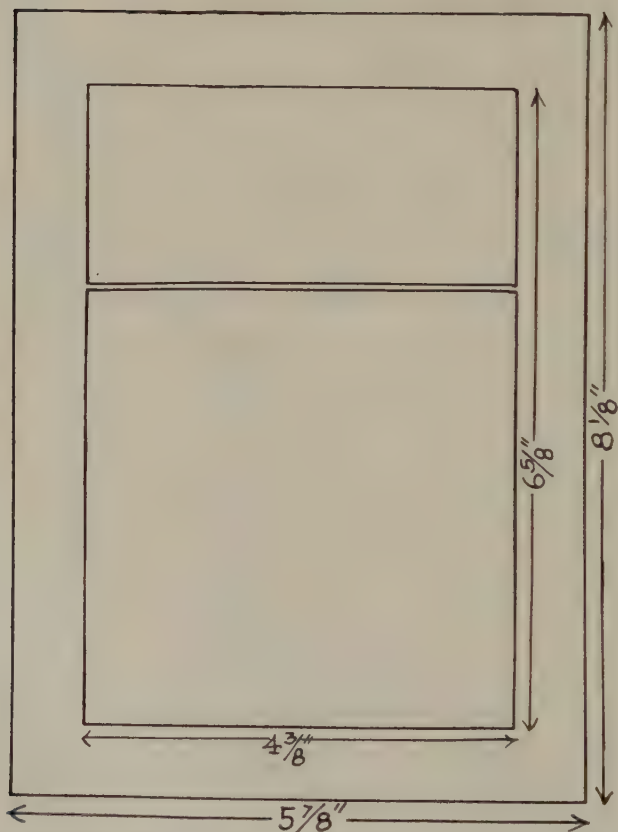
DIAGRAM OF EASEL BOARDS, SHOWING LAYOUT AND DIMENSIONS FOR COVERING PAPER FOR VISIBLE SIDE.
